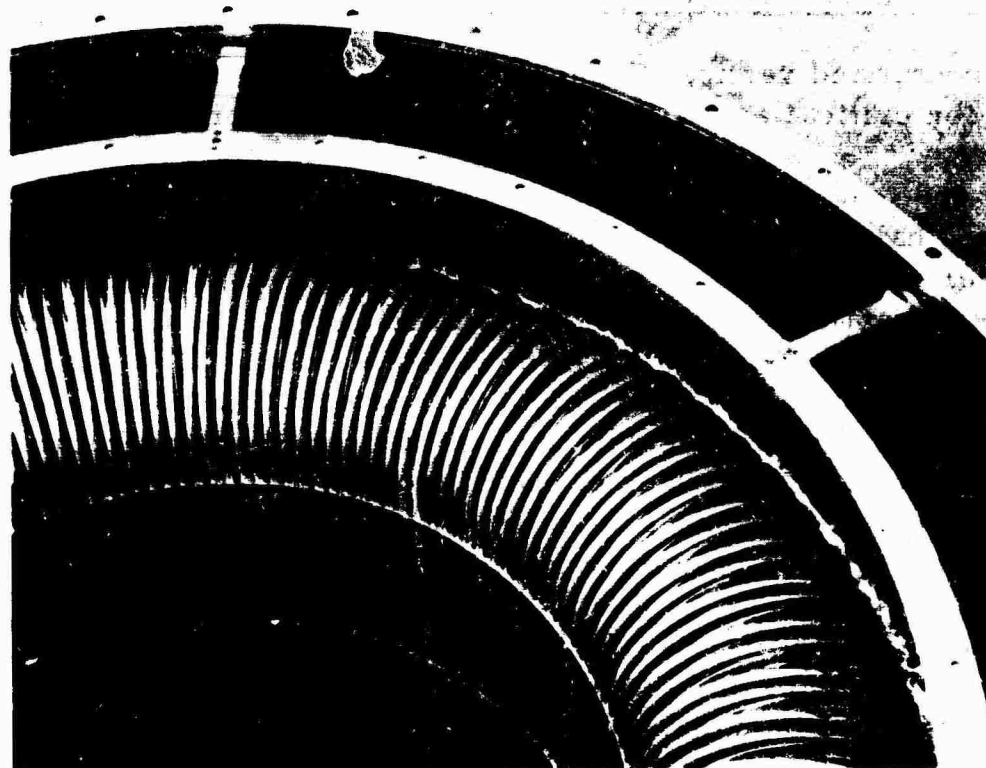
Regenerator Aft View Showing Asbestos Sealing Arrangement.
